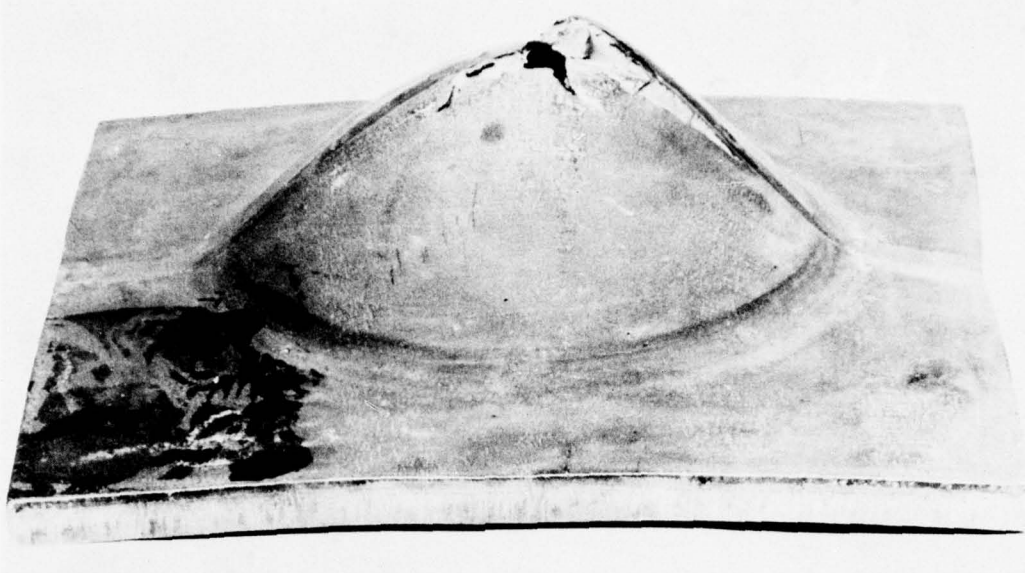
Explosion bulge performance of properly fabricated high alloy, high RAD-position steels. All zones of the weld region have plastic fracture properties.
